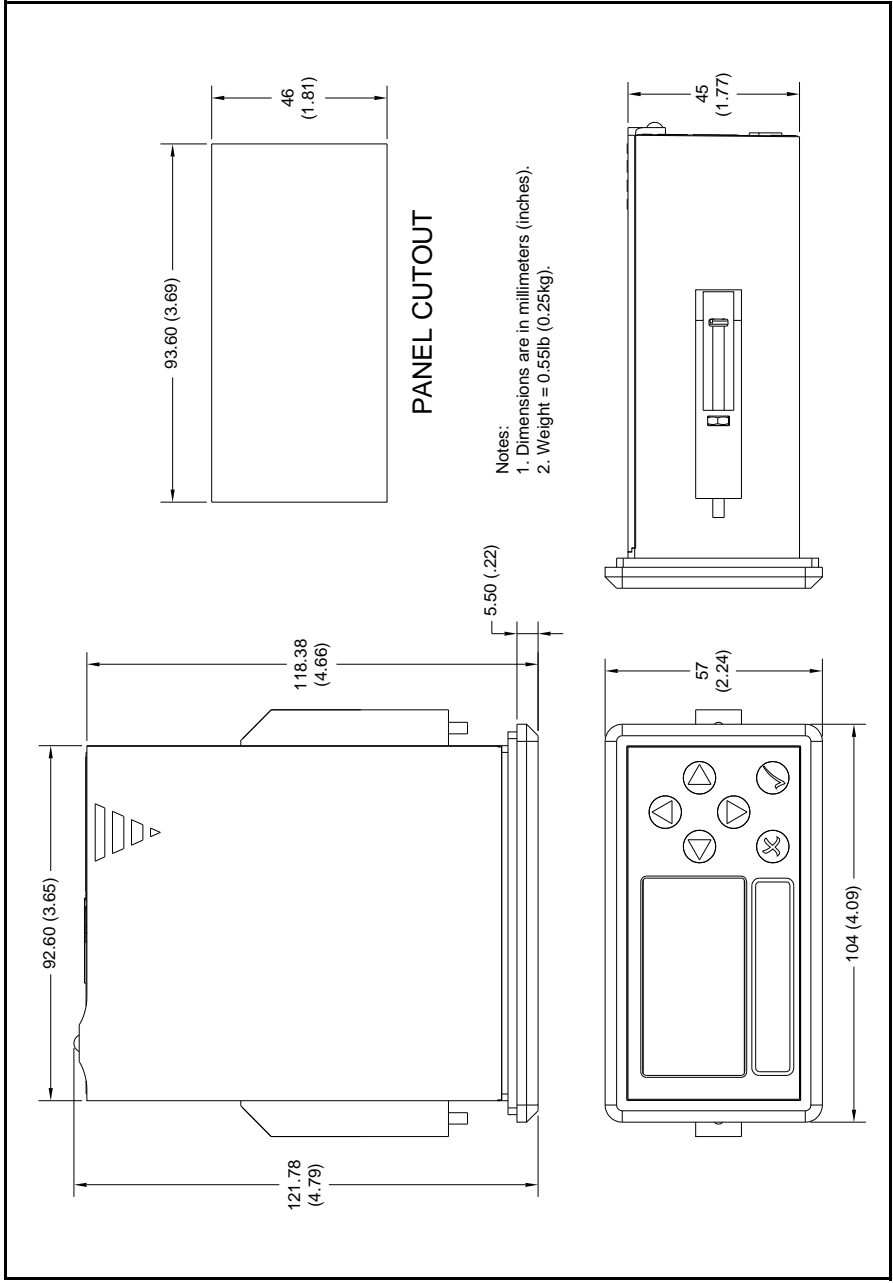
Outline and Mounting Diagram (ref. dwg #712-1550)
